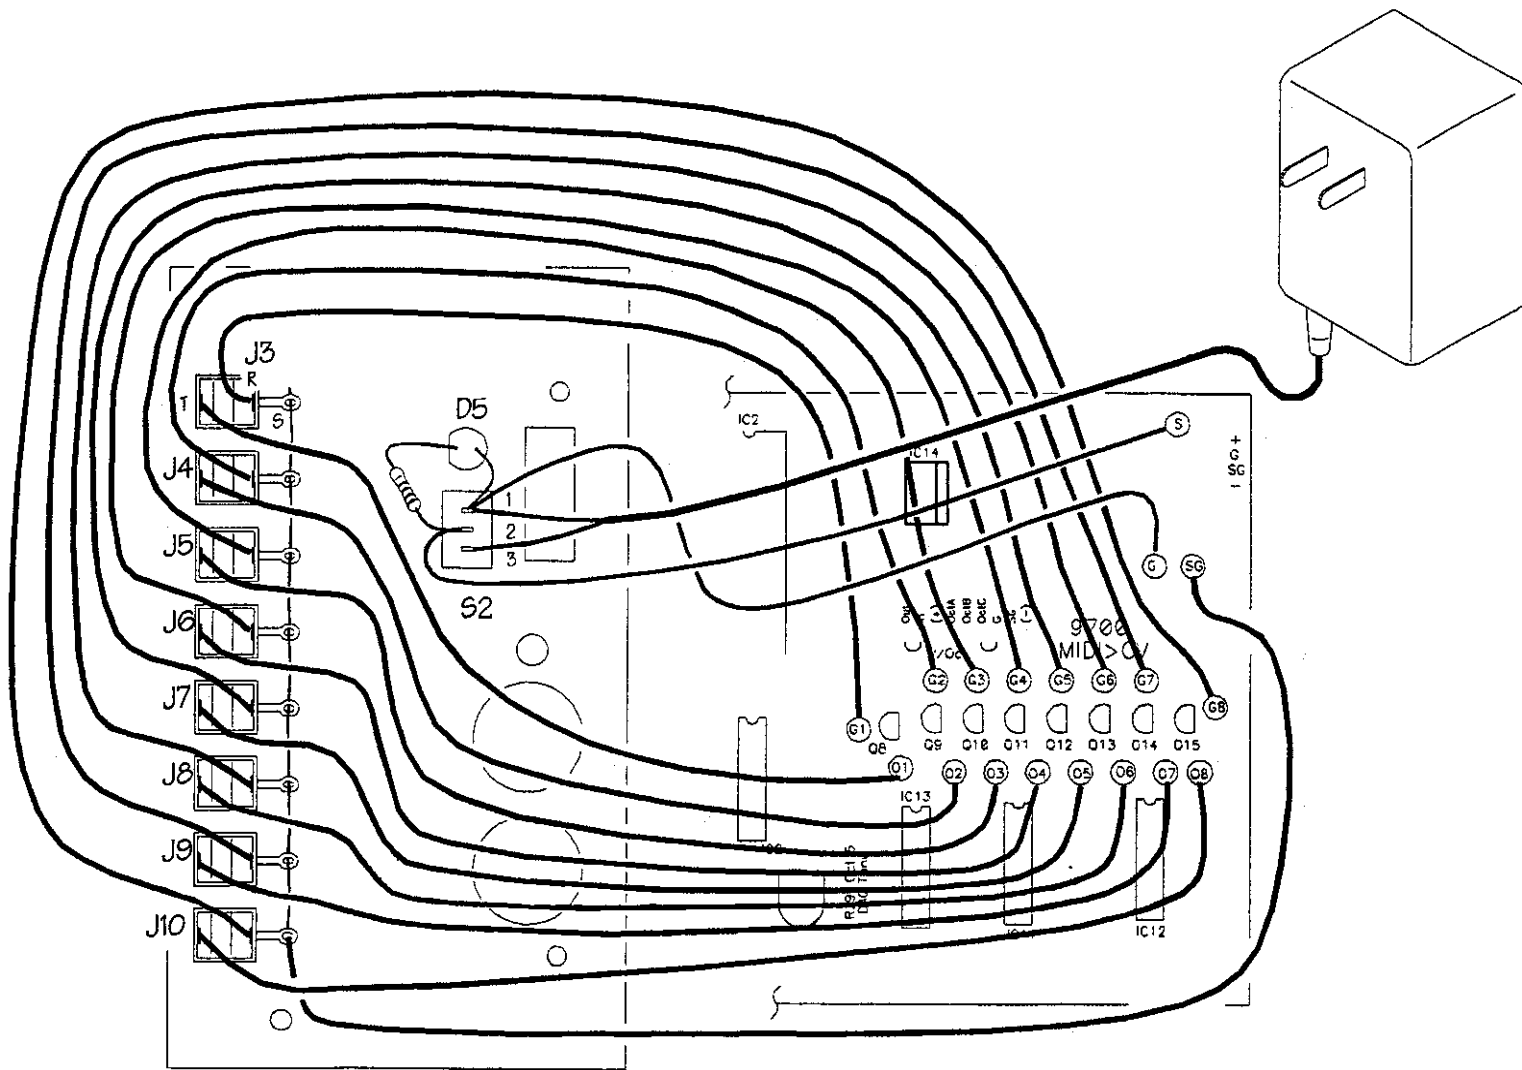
Stranded Insulated, Solid Insulated and Bare Wire are used to make the connections between the front panel jacks and power switch and the circuit board. The Power LED D5 and R38 mount on the lugs of the Power Switch.
